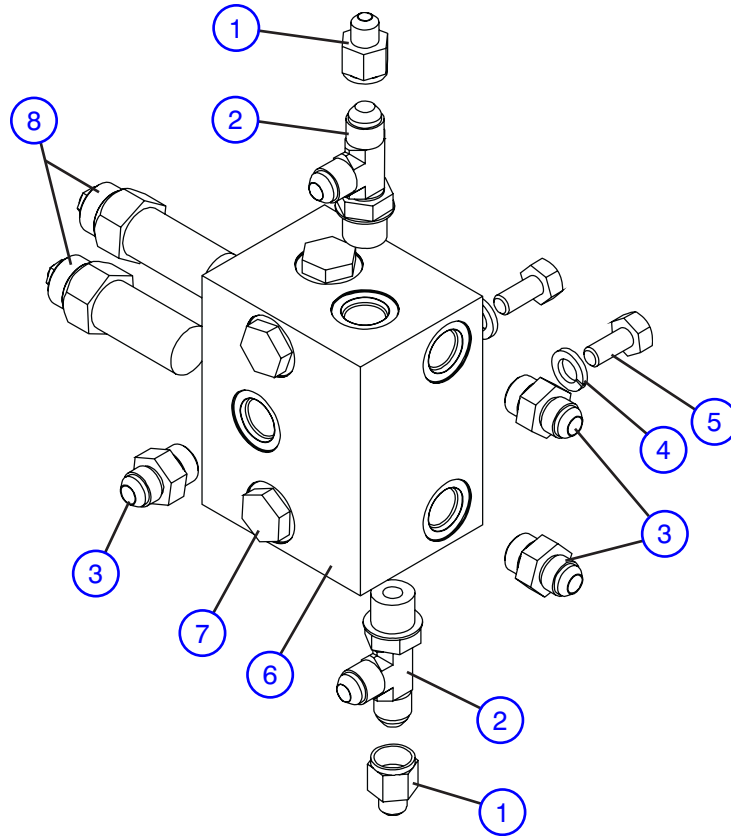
Brake Valve Assembly, Auto/Manual
